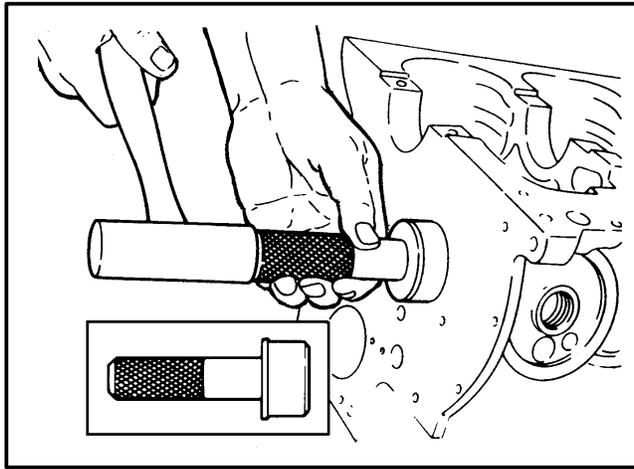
CAMSHAFT BEARINGS, REMOVAL AND INSTALLATION
